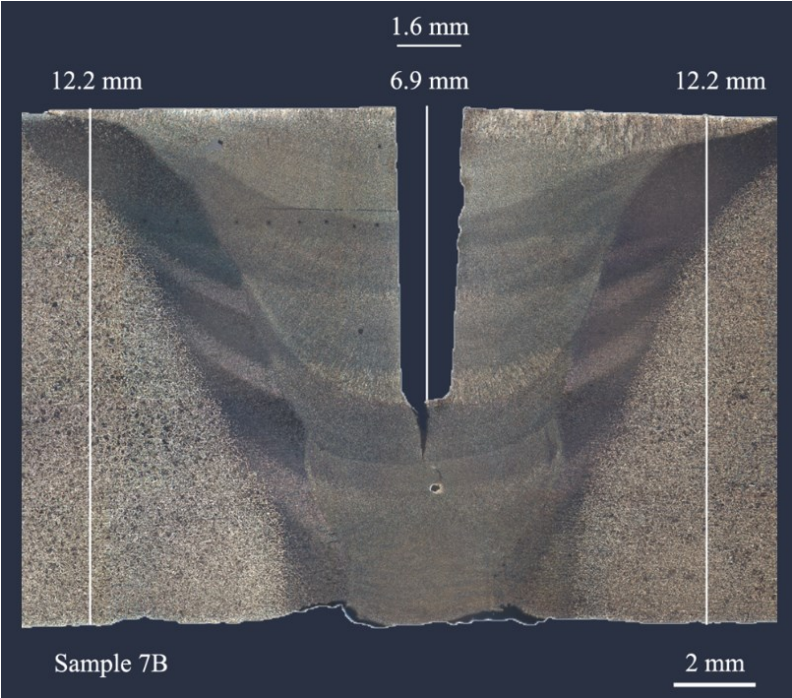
Partial fracture shown in the weld metal of sample 7 microscopy
